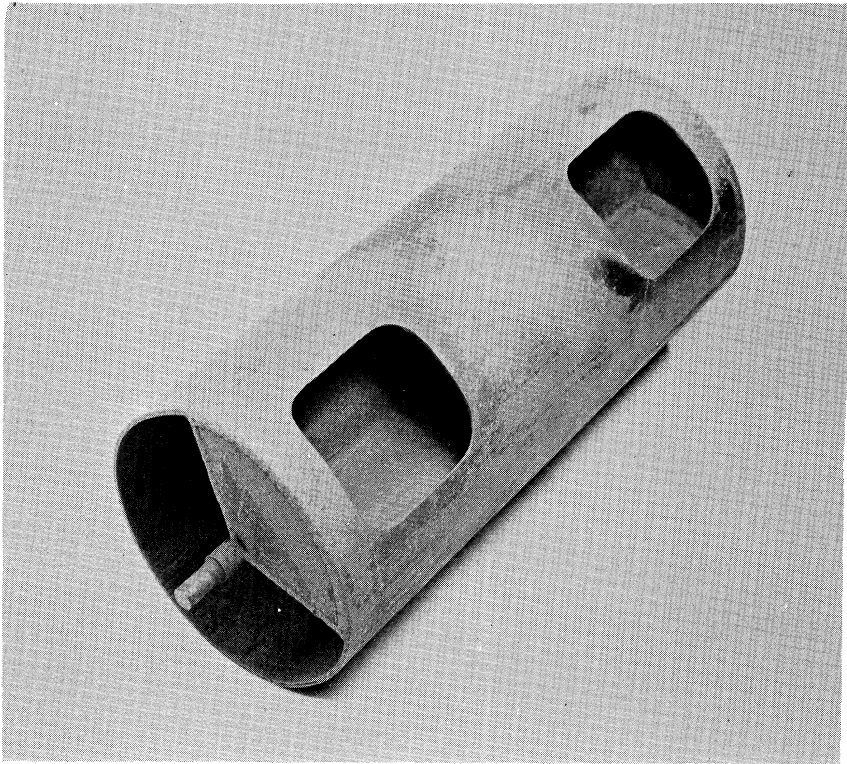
WAD reactor inner core—after 97-1/2 hours testing.
